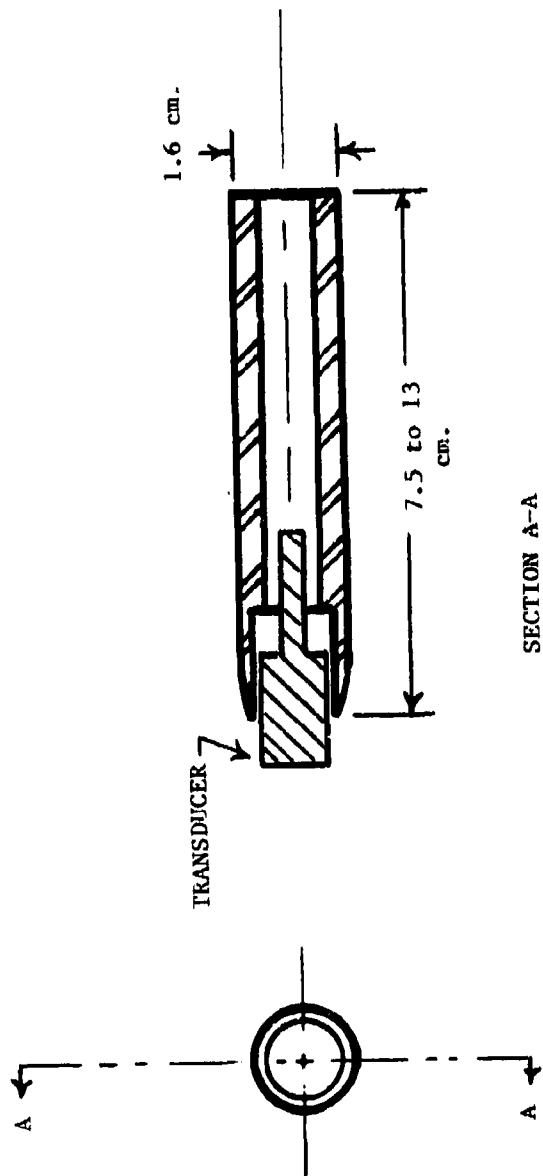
Dimensions of the blunt cylinder mount (courtesy of US Army Human Engineering Laboratory).
